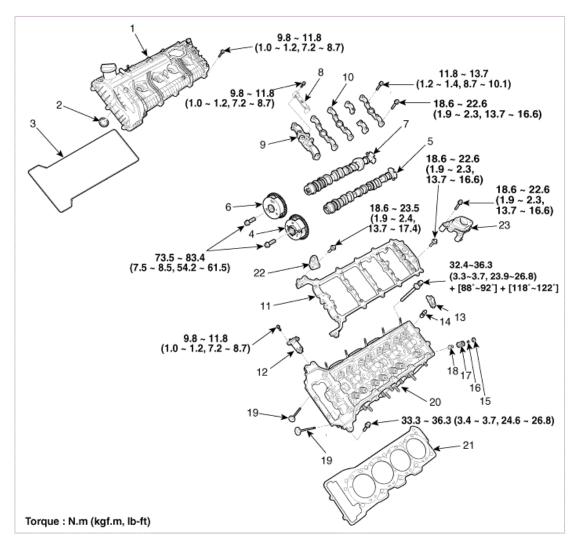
Identifying Cylinder Head Assembly Components With Torque Specifications (LH) Courtesy of HYUNDAI MOTOR AMERICA
